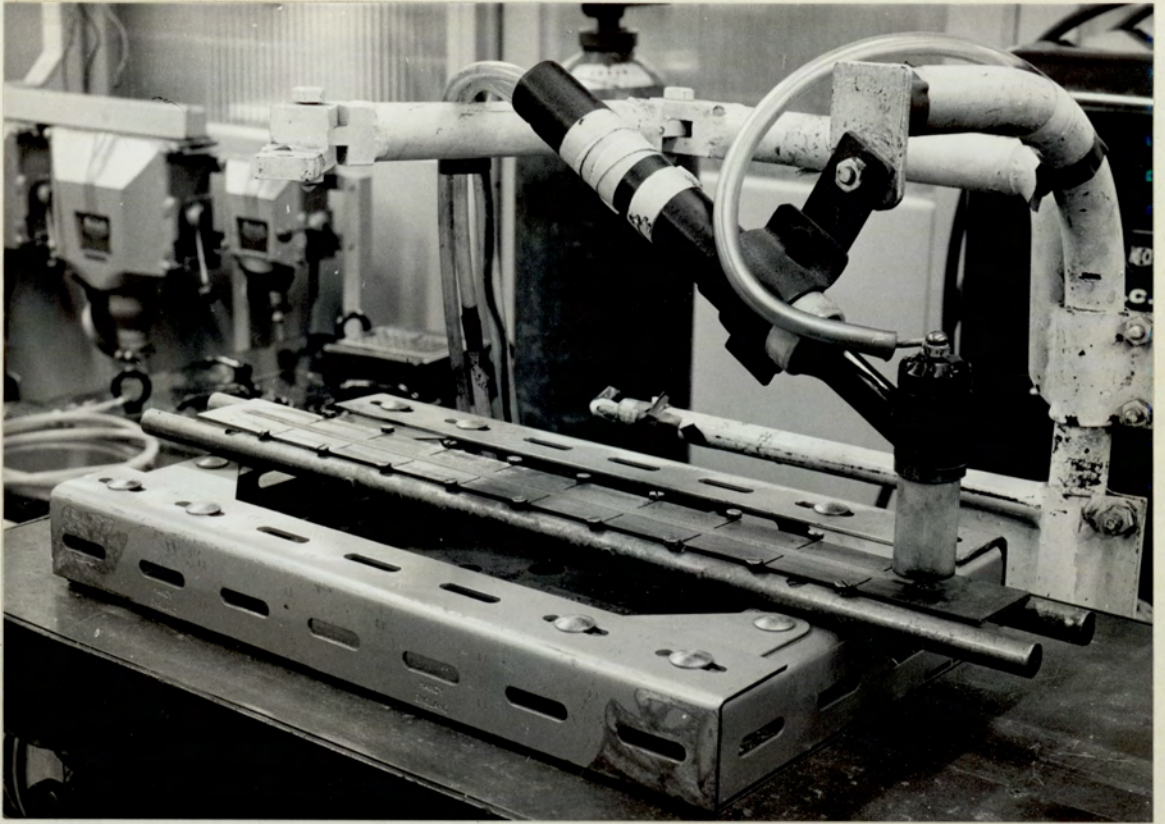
The Huxley Test Apparatus used in the present investigations, shown at the completion of welding.
